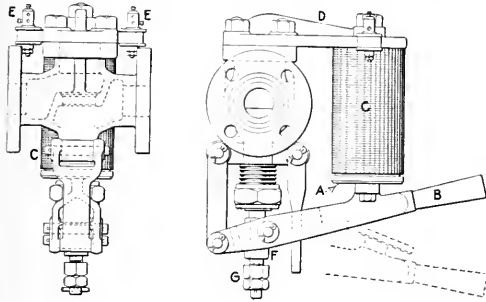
FRONT AND SIDE VIEW OF THE ELECTRICALLY OPERATED VALVE
